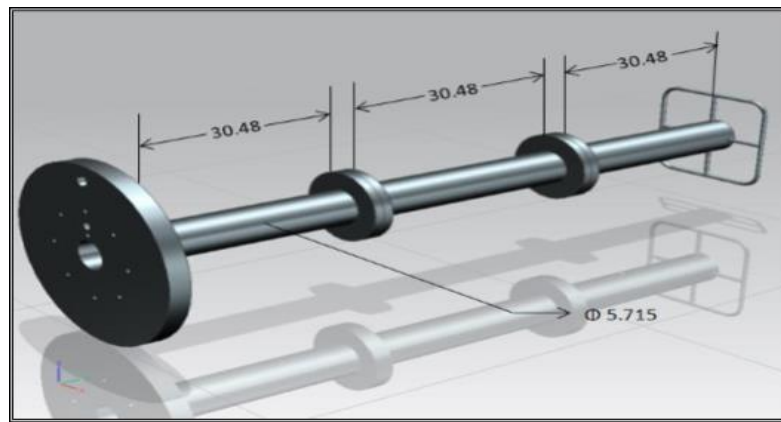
Full assembly of inlet manifold. Dimensions in cm.
